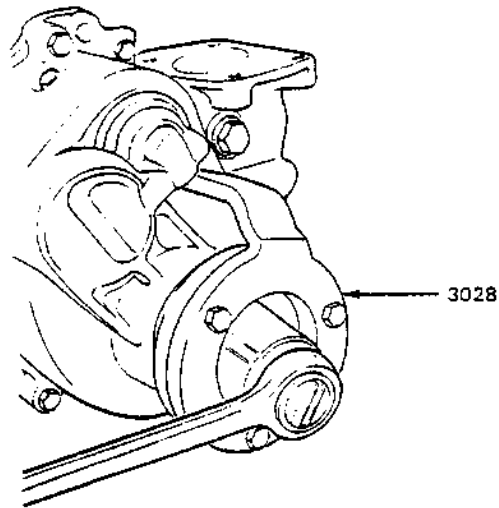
Removal of Propeller Shaft Drive Flange Nut
